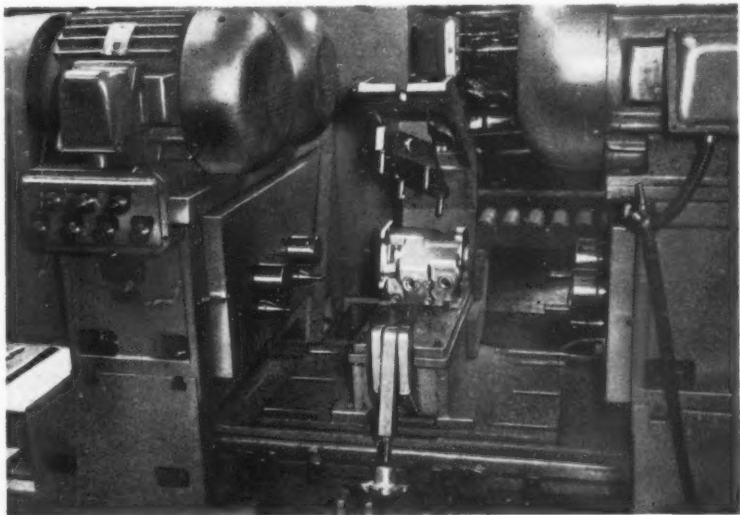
On this Ex-Cell-O Fine-boring Machine, the Bores for the Mainshaft, Layshaft and Reverse Idler Gear Shaft are Finished on Two Castings Simultaneously, the Table Being Fed Towards Each Set of Spindles in Succession
